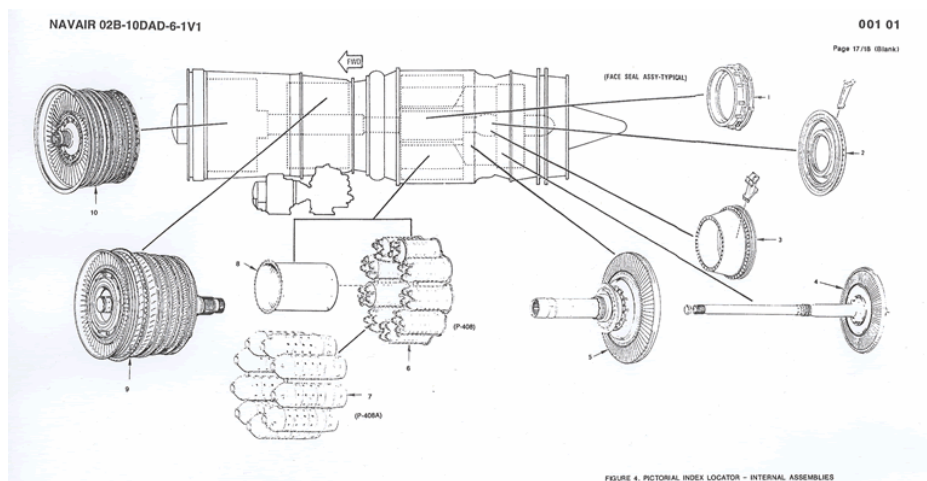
J52-P408 Exploded View of Internal Components.⁷⁸
